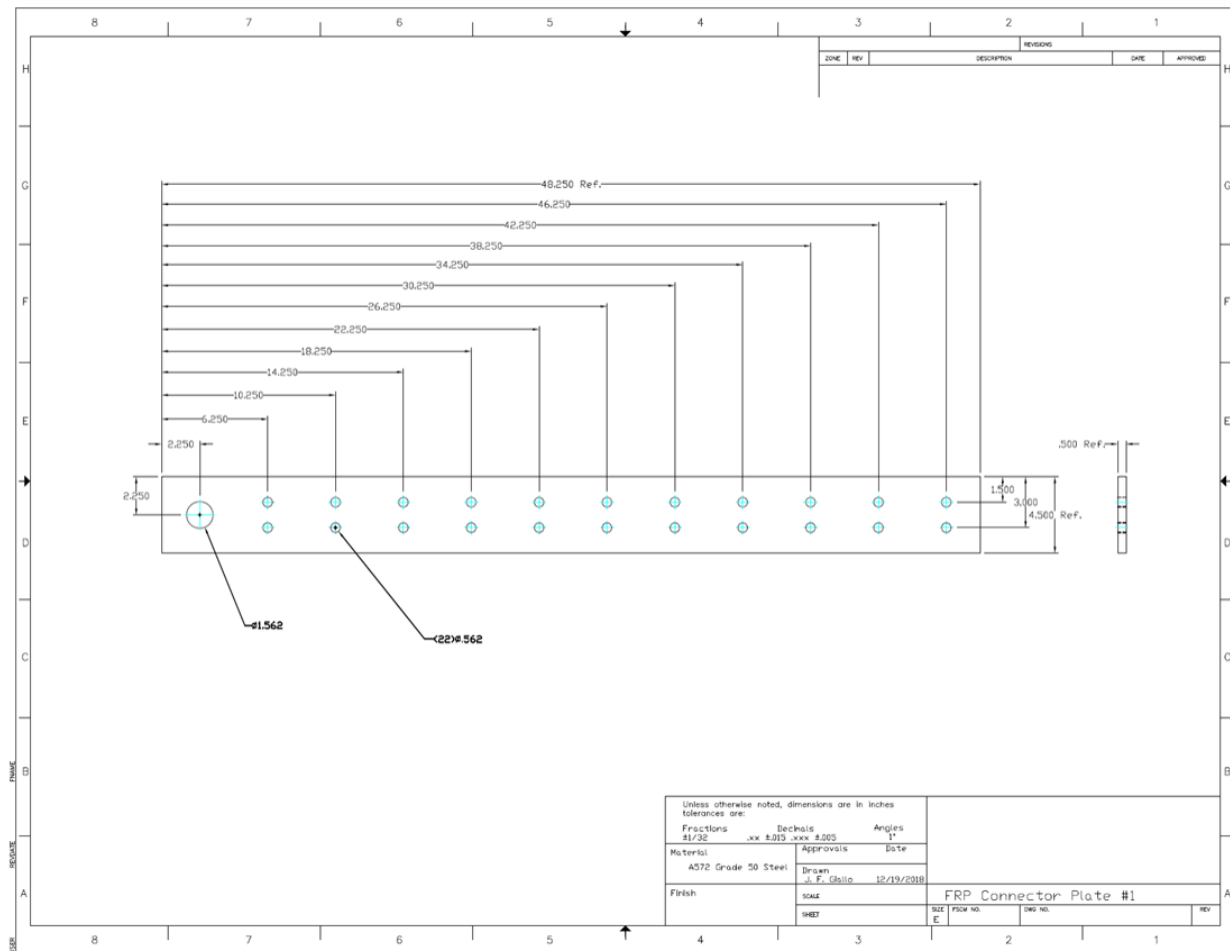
FRP connector plate 1 machinist as-built drawing.
